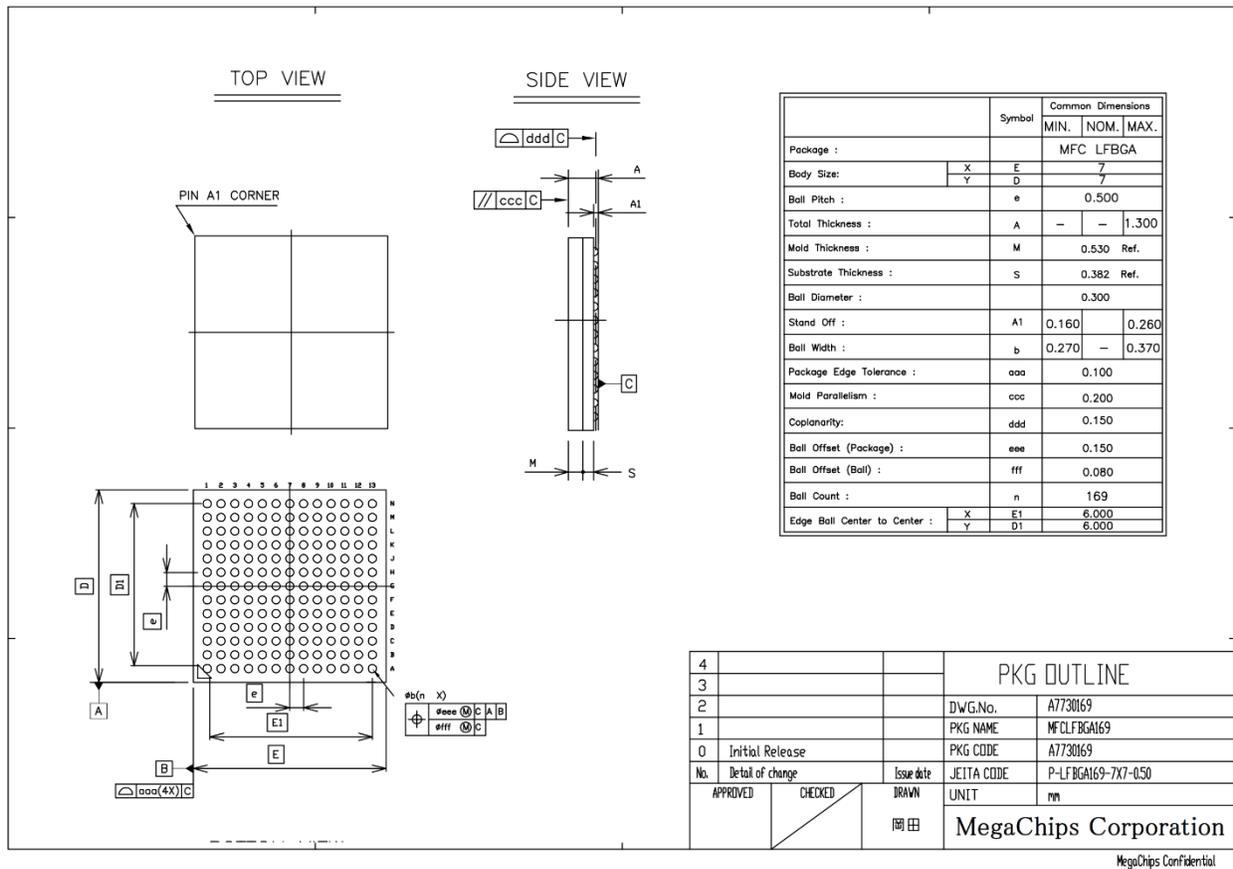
Mechanical Package Dimensions (MFCLFBGA169)
